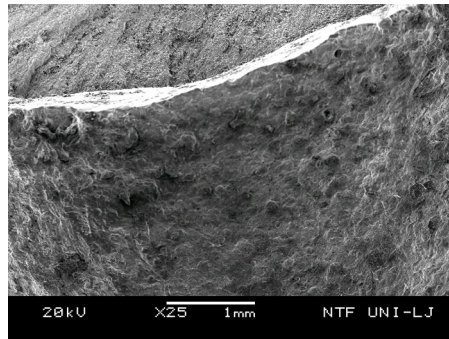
Upper part of a fracture surface represents a termination stage of a fatigue where spring broke instantly and lower area corroded surface of the spring.
